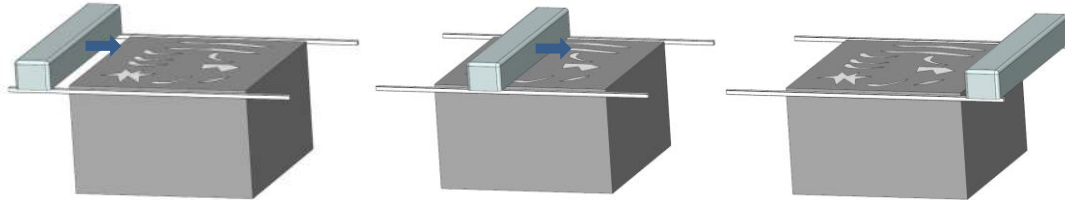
Inspection array probe surface inspection (probe moving rightwards)
